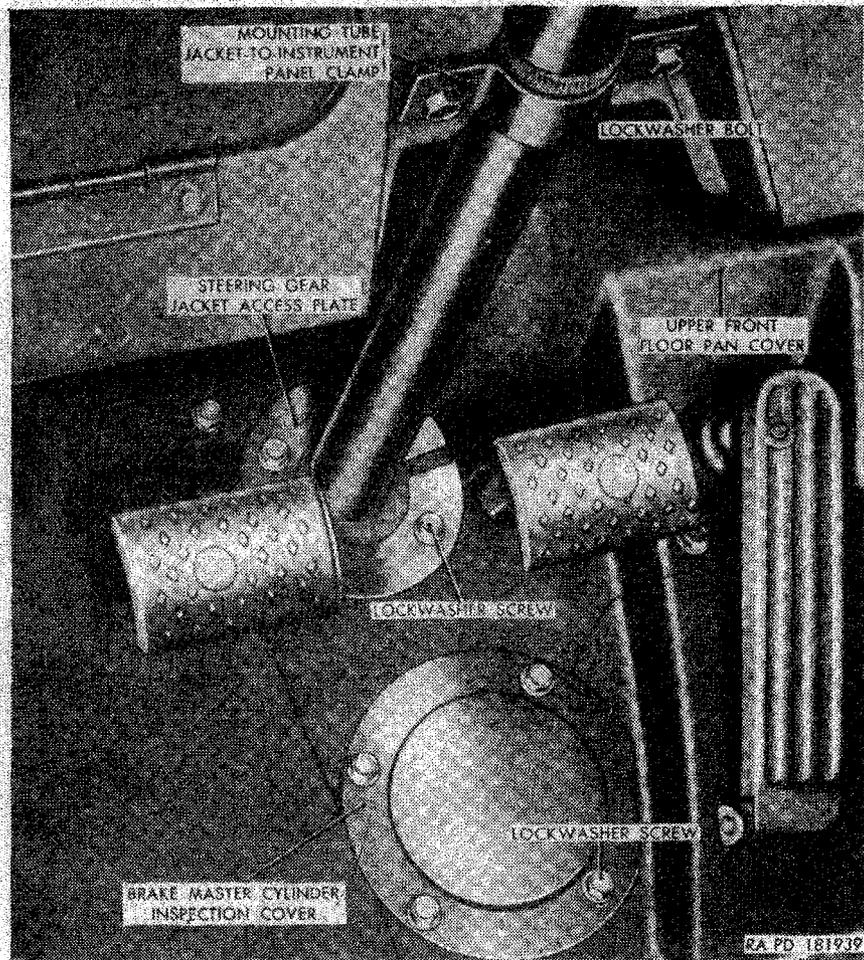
Disconnection points for steering gear removal—driver's compartment.
